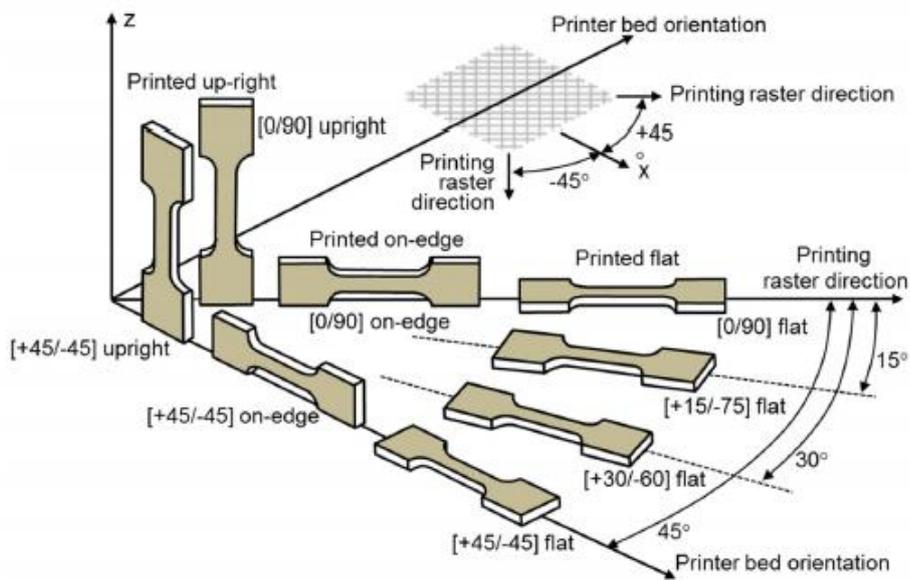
(f): Illustration of the printer bed fill angles for 30°, 45° and 90°
